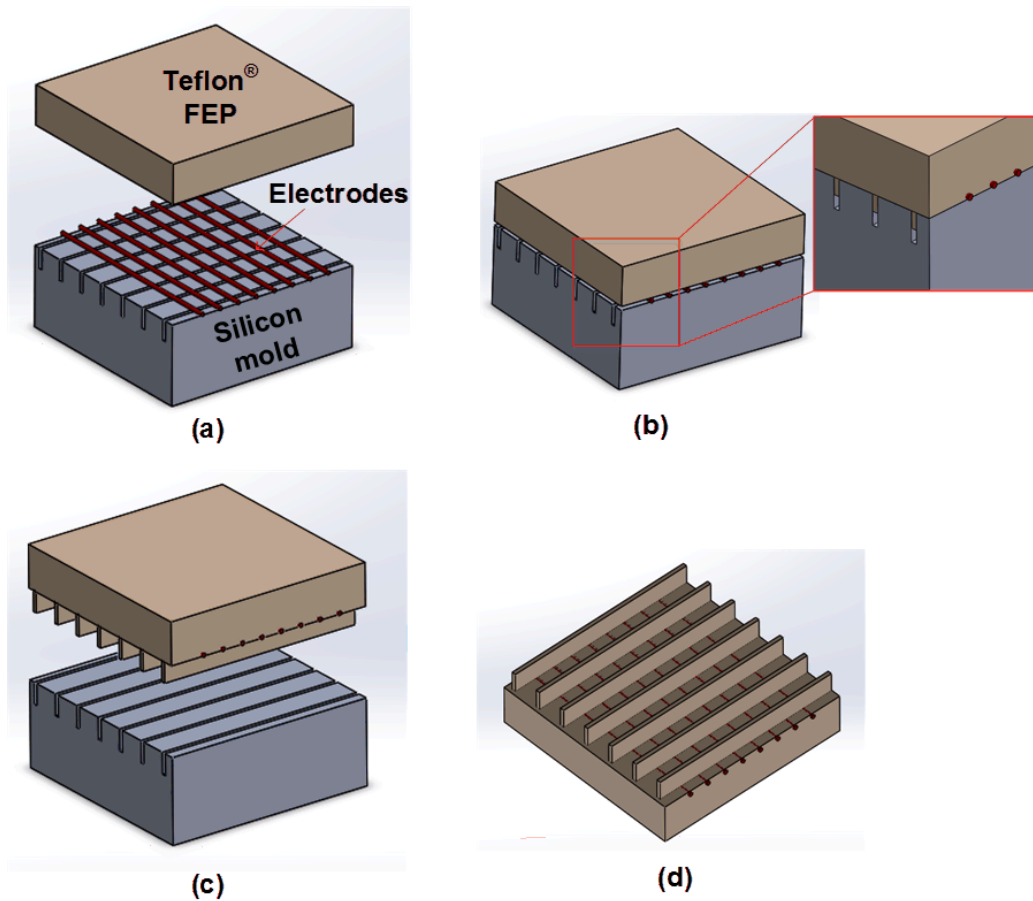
Active whole-Teflon SHPo surface fabrication process. (a) Electrodes were placed on silicon mold. (b) Molding process with Teflon FEP flew into the trench while electrodes are still in contact with mold. (c) Demolding after the mold was cooled down. (d) Final whole-Teflon SHPo surfaces with exposed electrodes at the bottom of the micro-gratings.
